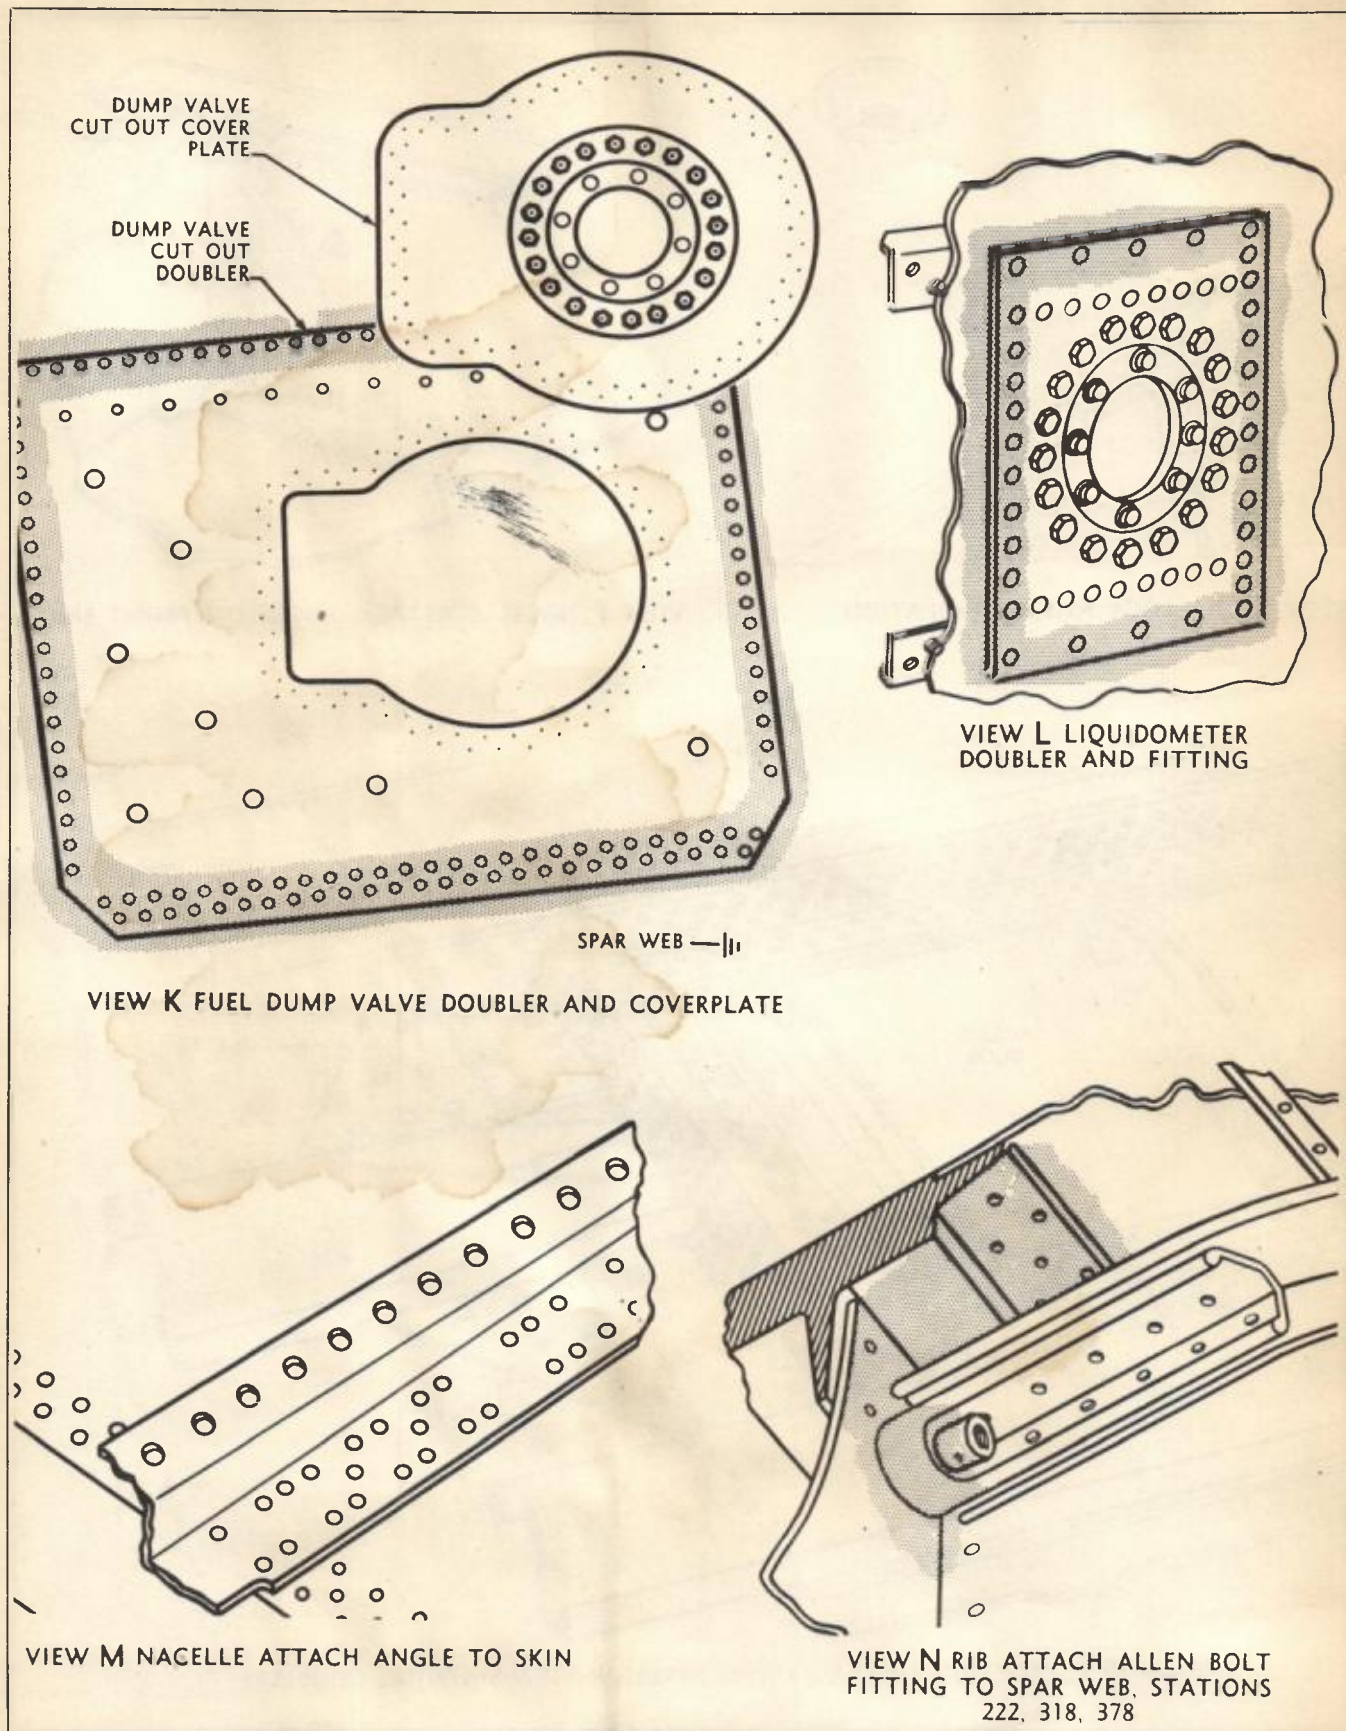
(Sheet 4 of 6 Sheets) — Fuel Tanks — Possible Leakage Areas
